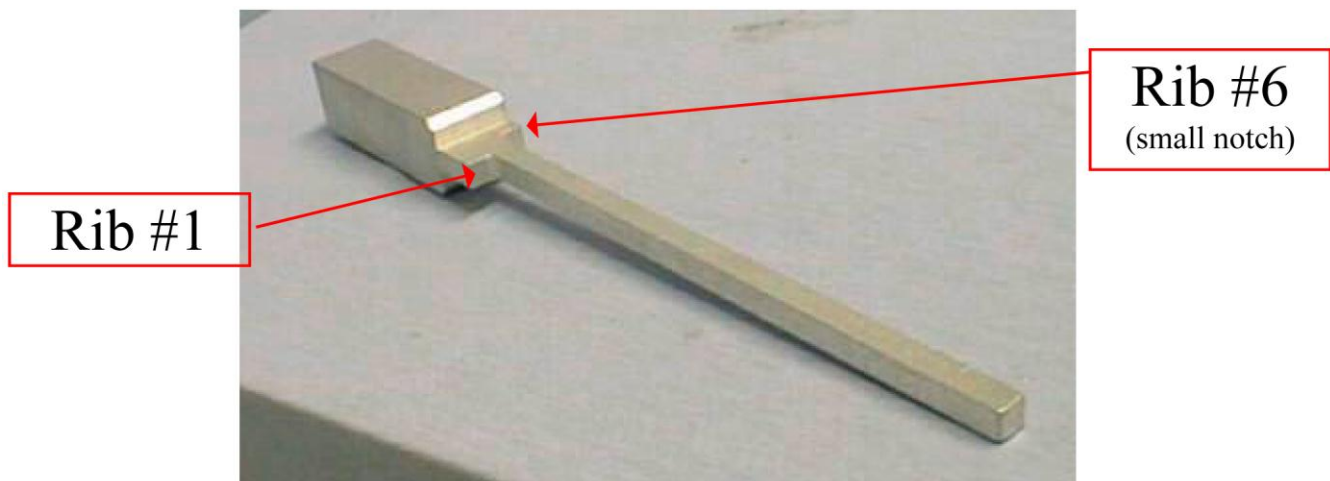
CHEST DEPTH MEASUREMENT TOOL
